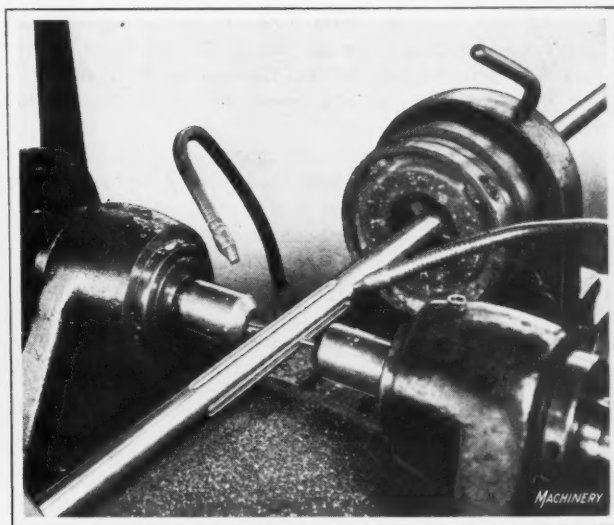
Milling the Pilot Strip Grooves in the Bar on a Duplex Slot Milling Machine
